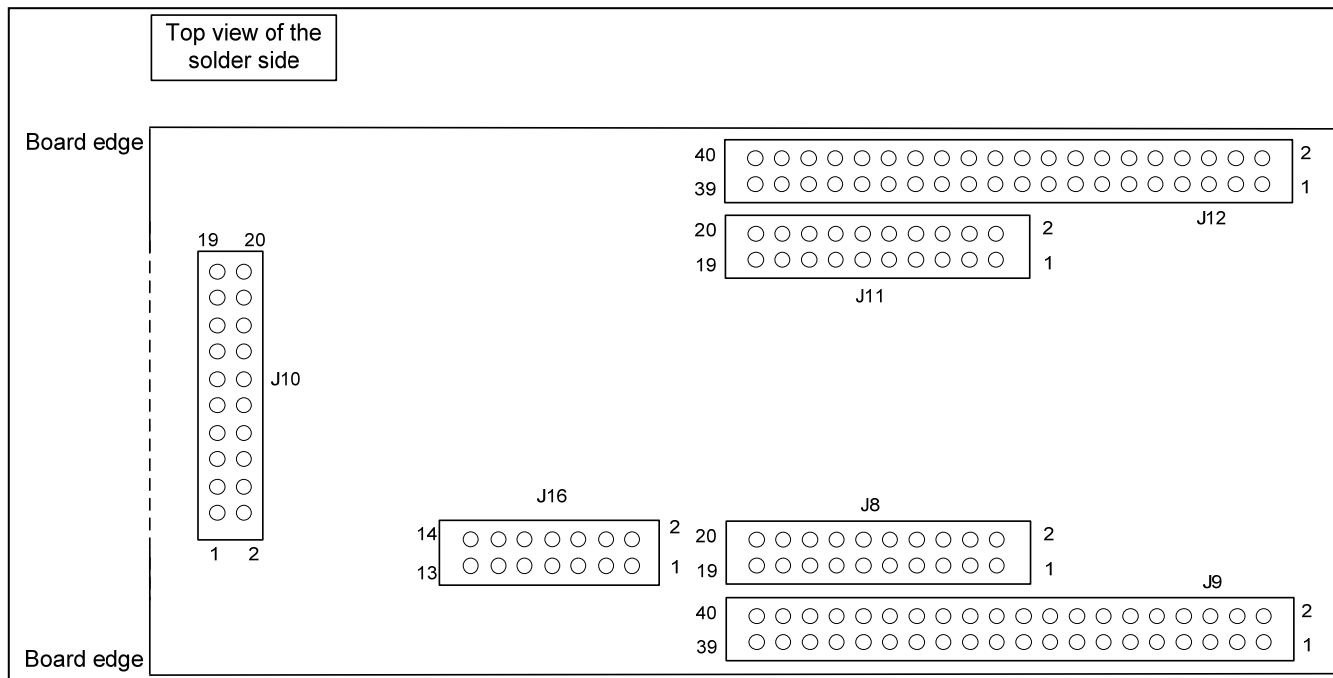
Extension Connector Pin Assignments (Top View of the Solder Side)
